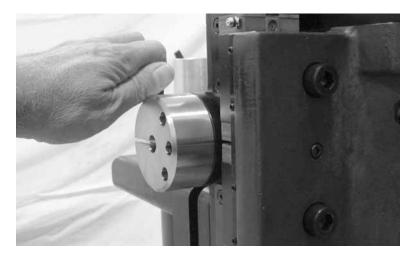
Loosen the feed lock lever enough to raise the spindle assembly with the feed handle. Tighten the lock when installing the tooling.
